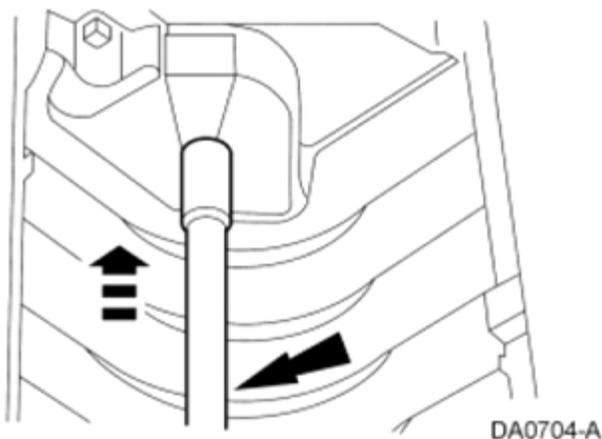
Sliding Coolant Tube With O-Ring Seals Into Cylinder Block
